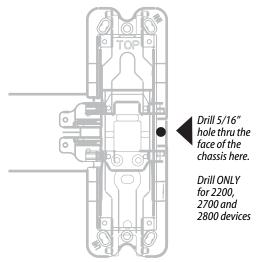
Drilling 5/16" hole for Precision 2200, 2700, and 2800 exit devices only
